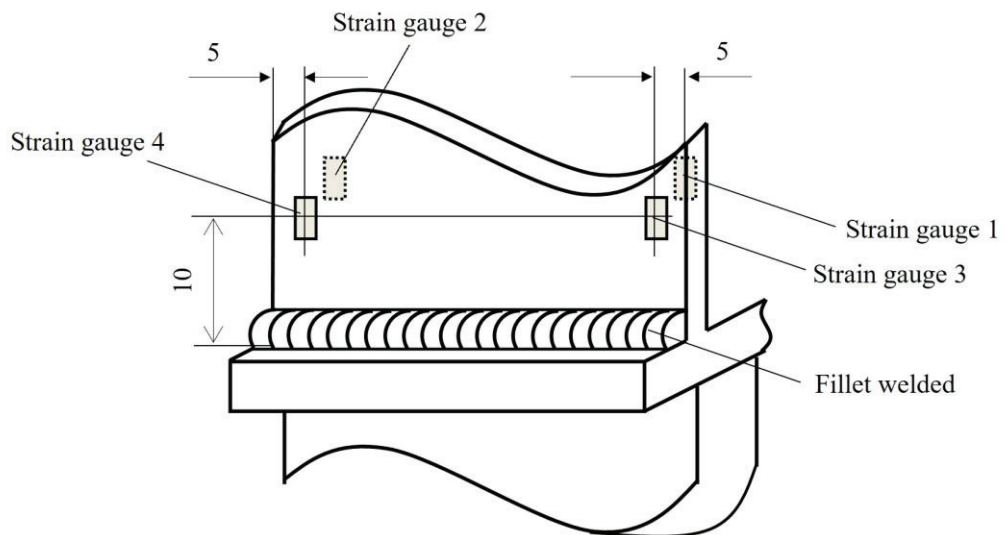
Position of the strain gauge near fillet weld (unit : mm)
